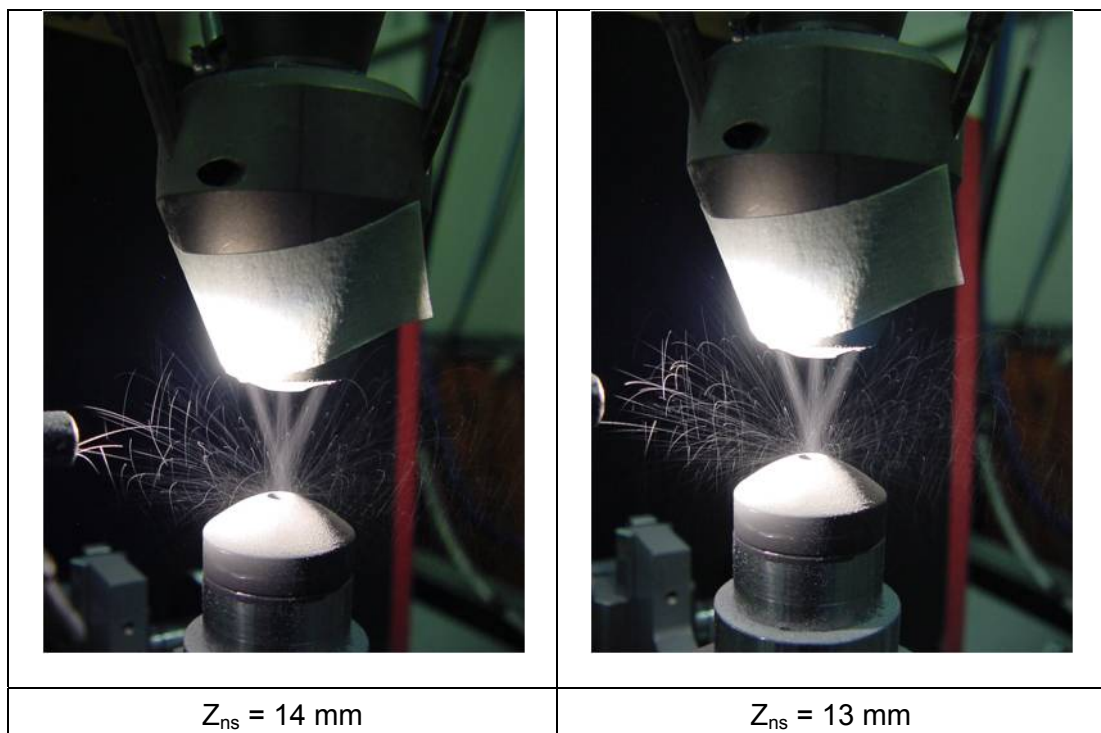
Visual inspection of the alignment between the coaxial nozzle work axis and the alignment test jig work axis (centre of the conical nozzle) representing the beam propagation axis
